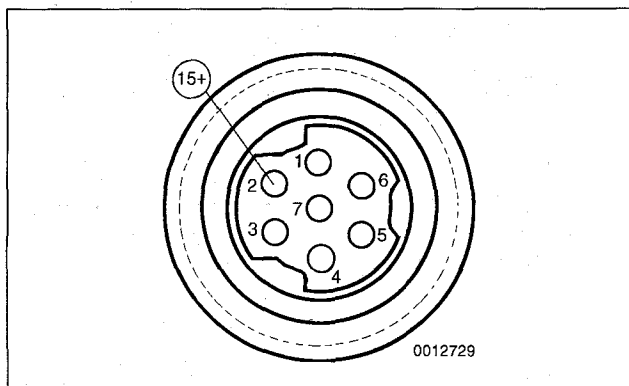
Ignition coil harness connector terminal identification for M44 engine.
